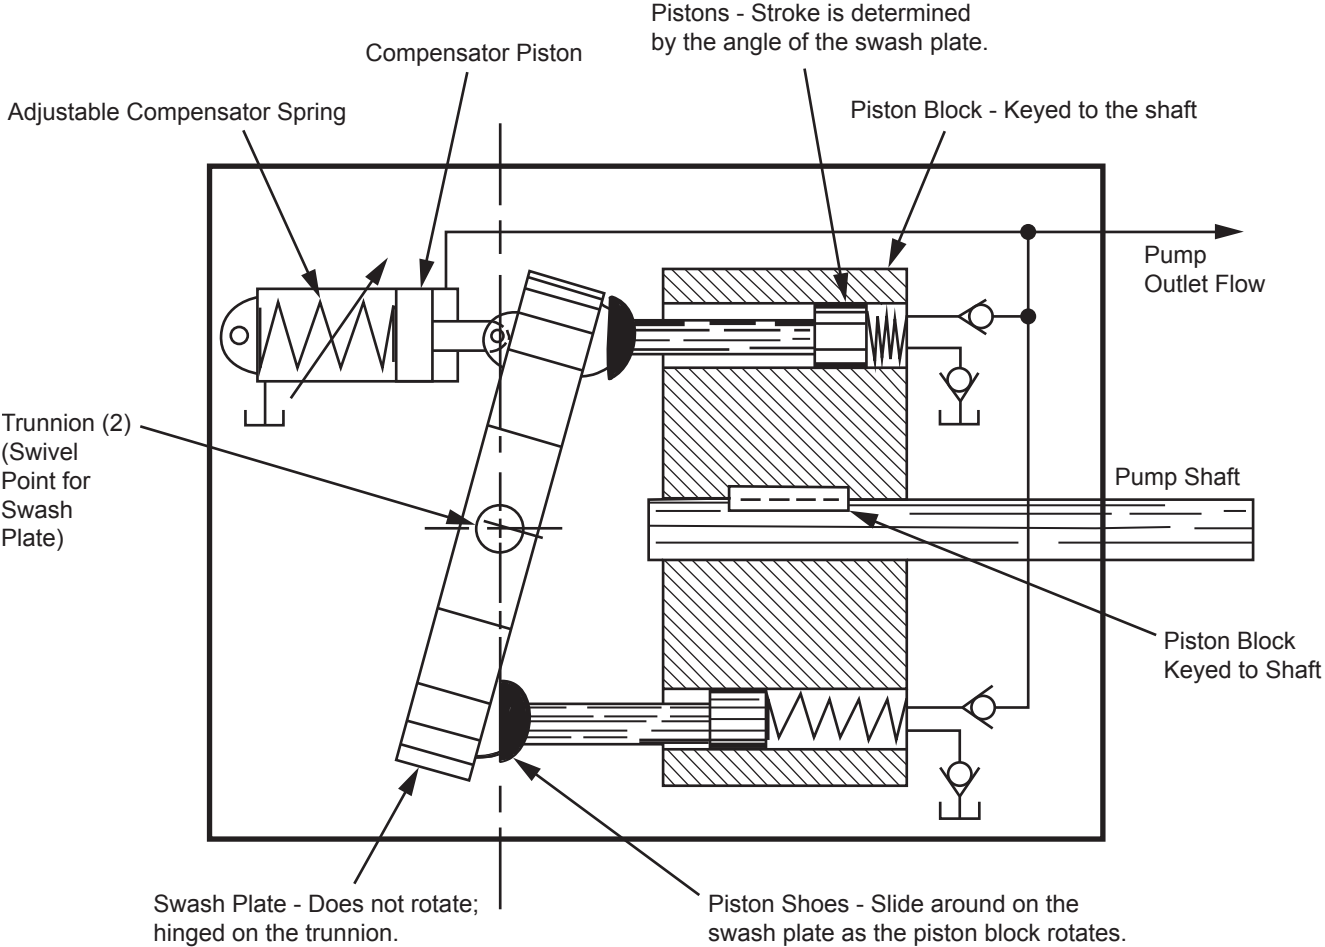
Schematic of a variable displacement, check valve piston pump, with built-in pressure compensator.
